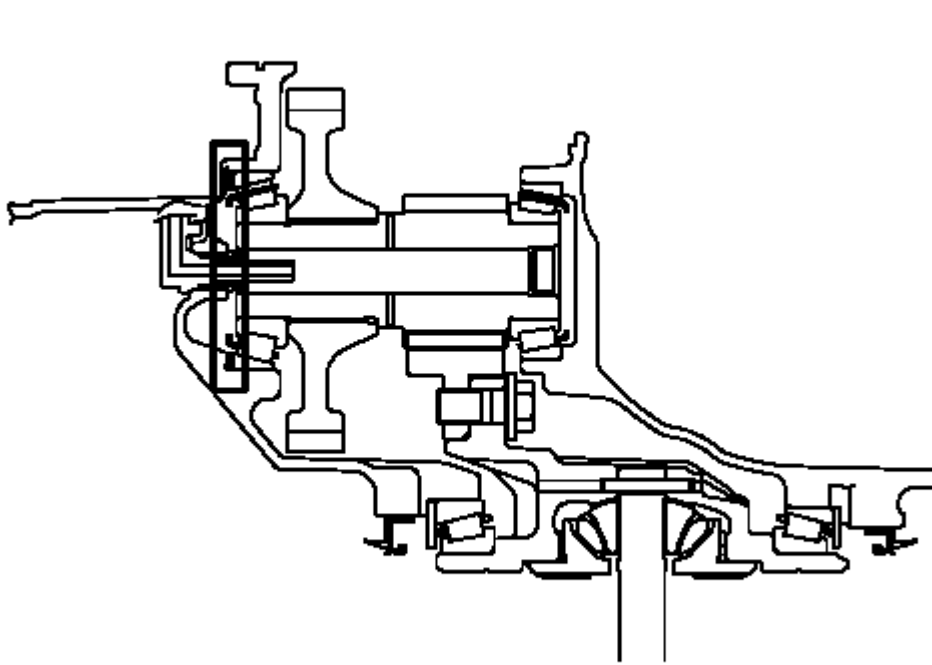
Counter Driven Gear Bearing Race Adjuster Shim
